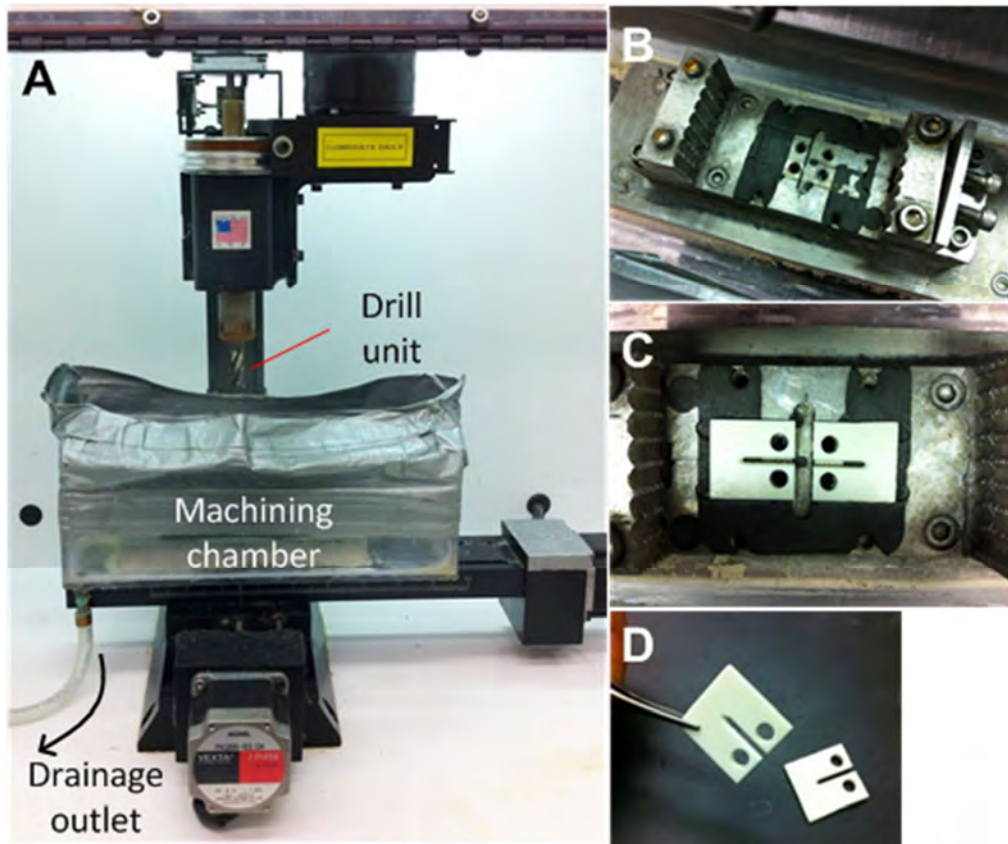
(A) CNC setup for compact tension (CT) specimen machining where the machining chamber was filled with saline during the entire machining process. The chamber contains (B) a specimen vice to grip the femoral section during the initial cutting process and (C) a die platform to hold the CT specimens during machining of the finer details. (D) Typical fully machined CT specimens.
